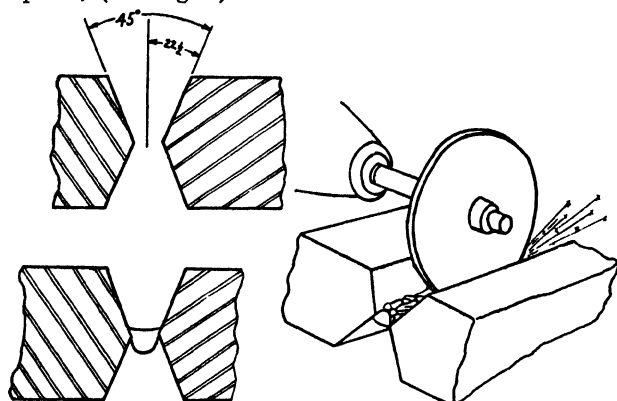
(top left). Double-V weld. Fig. 5. (bottom left). Root bead. Fig. 6. (bottom right). Grinding root bead.
